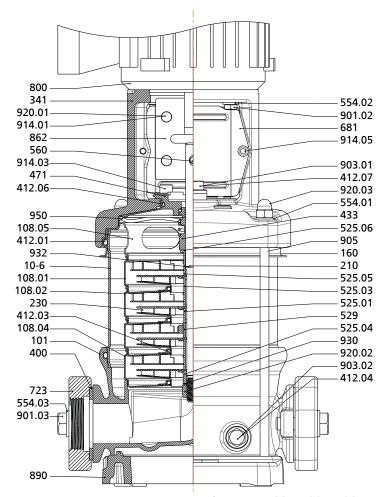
General assembly drawing of Movitec 2(L)B, 4(L)B, 6(L)B
